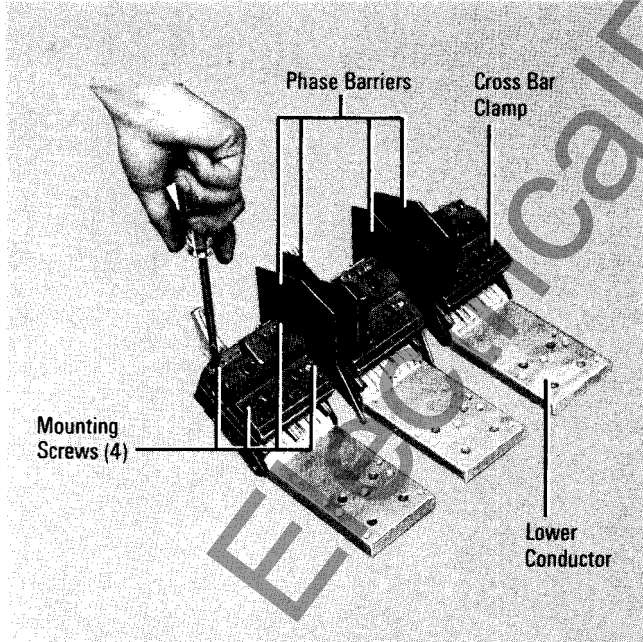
Removal of Single Pole Conductor Sub-Assembly From Moving Contact Arm Assembly.
